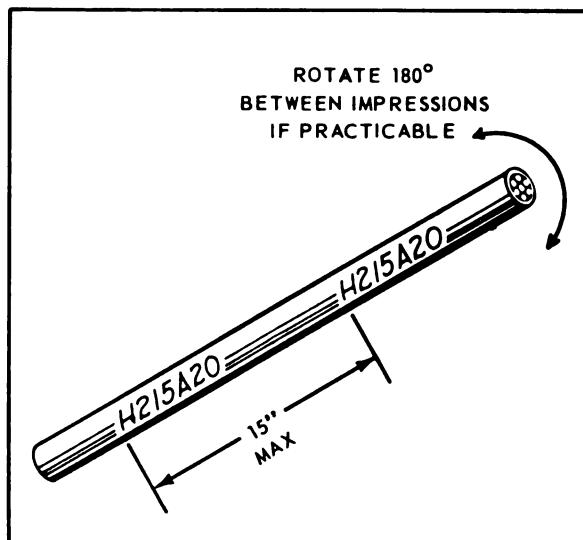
Spacing of Identification Stamping on Wire & Cable
